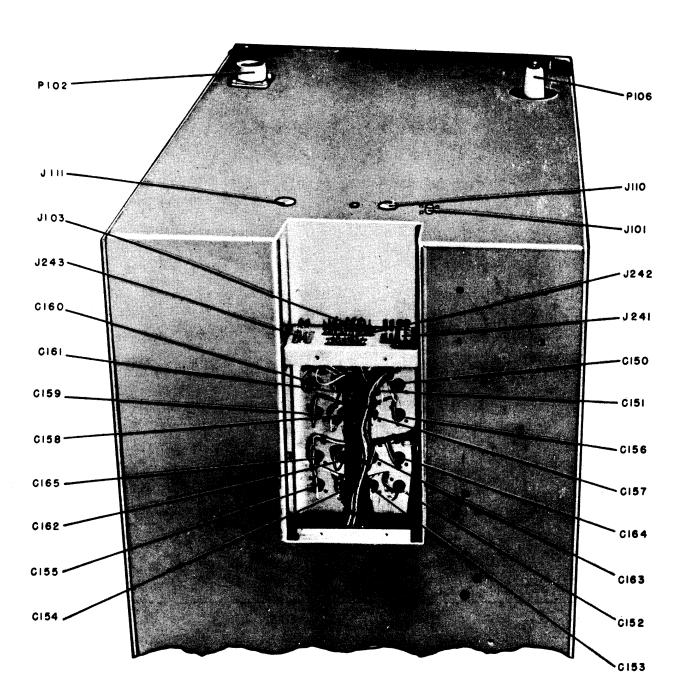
R-F Assembly, Rear View, Location of Parts
